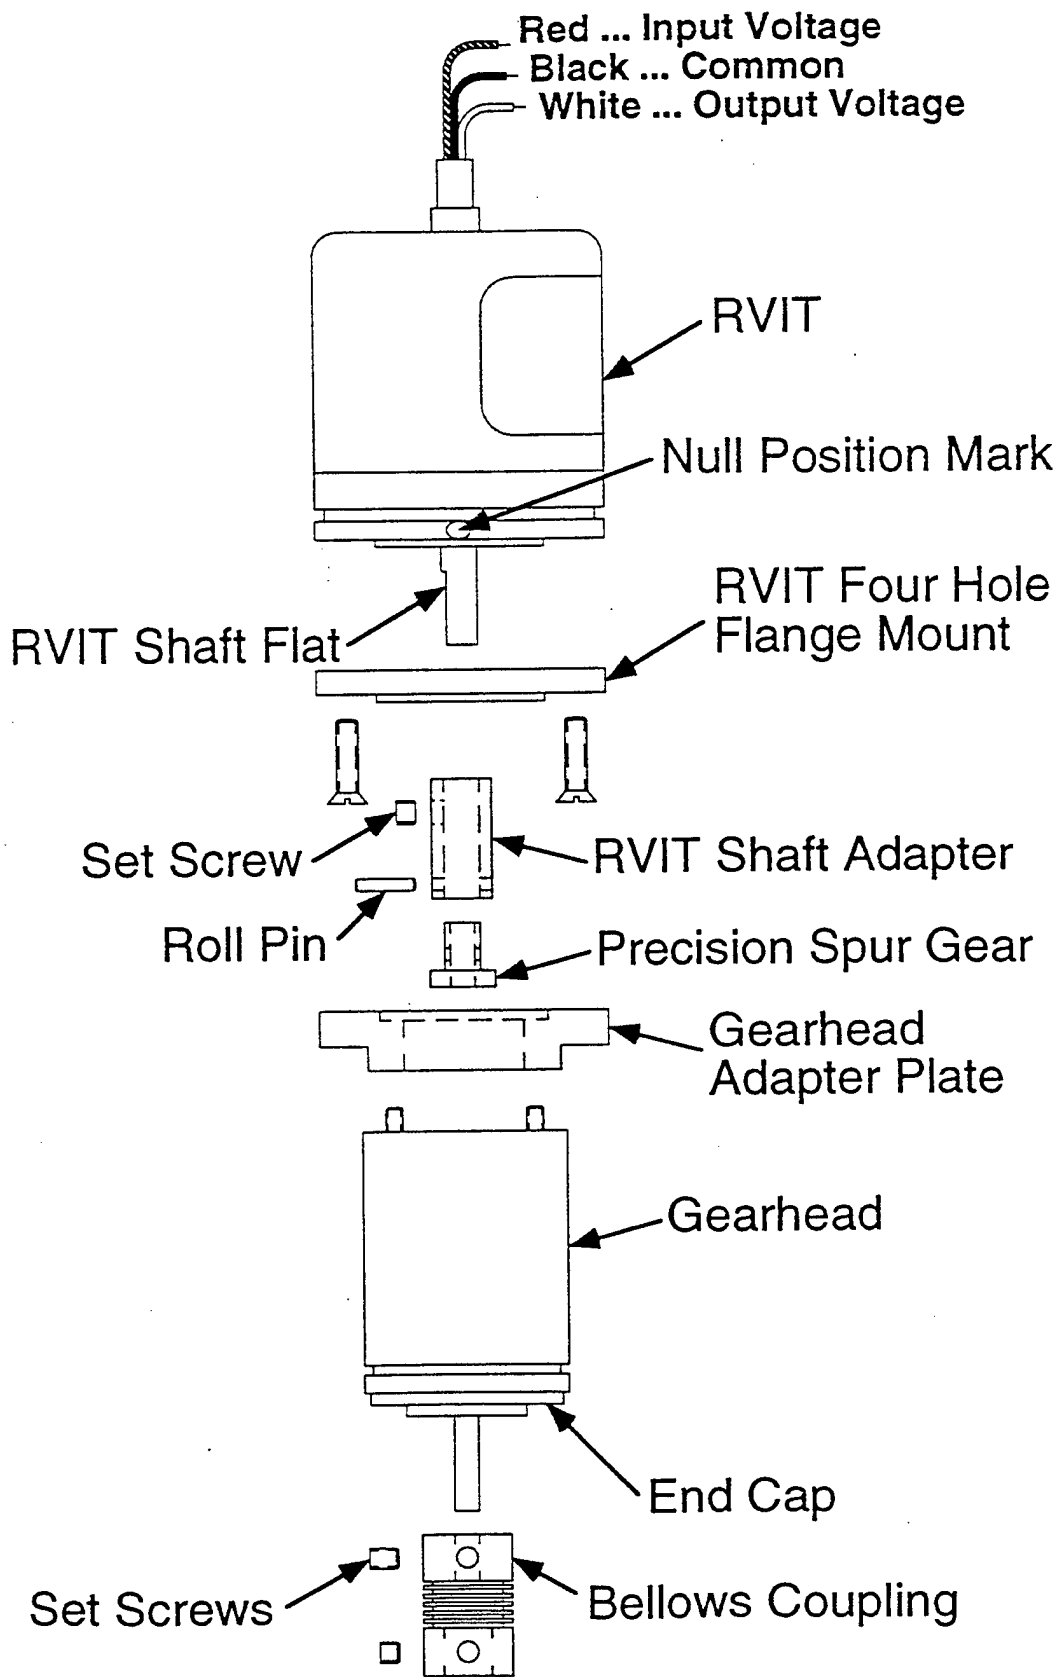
RVIT/Gear Head Subassembly: Exploded View.
